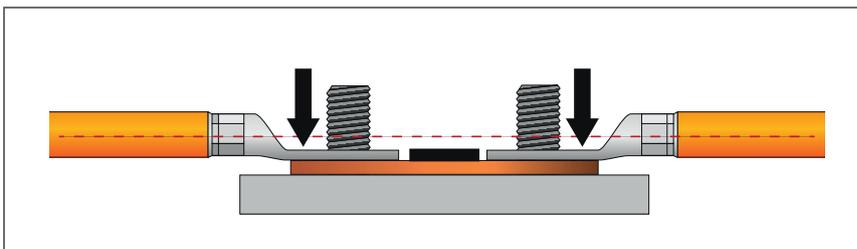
HV BM 1.2, place the shunt module and the ring terminals on the threaded bolts
